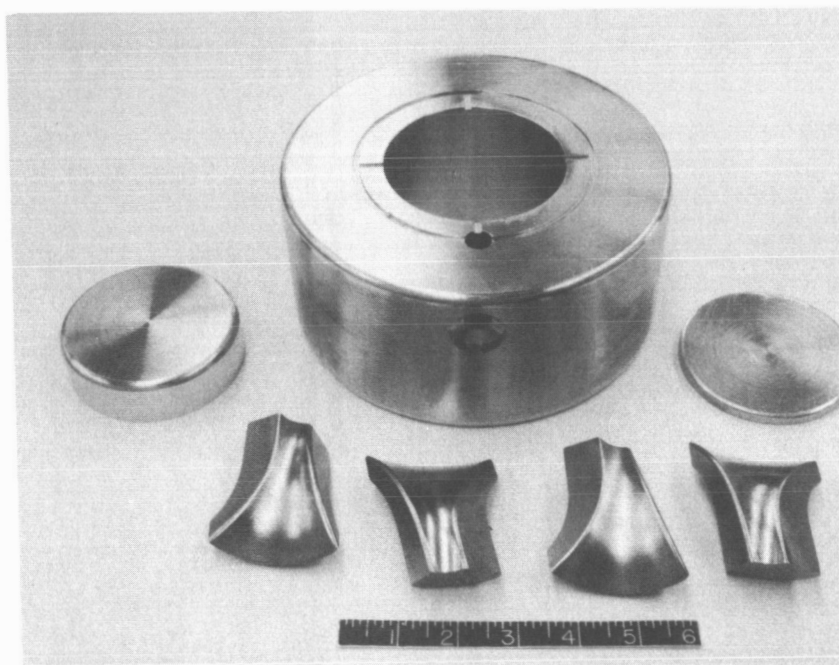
Cores, Pressure Plates, and Outer Containment Tooling
